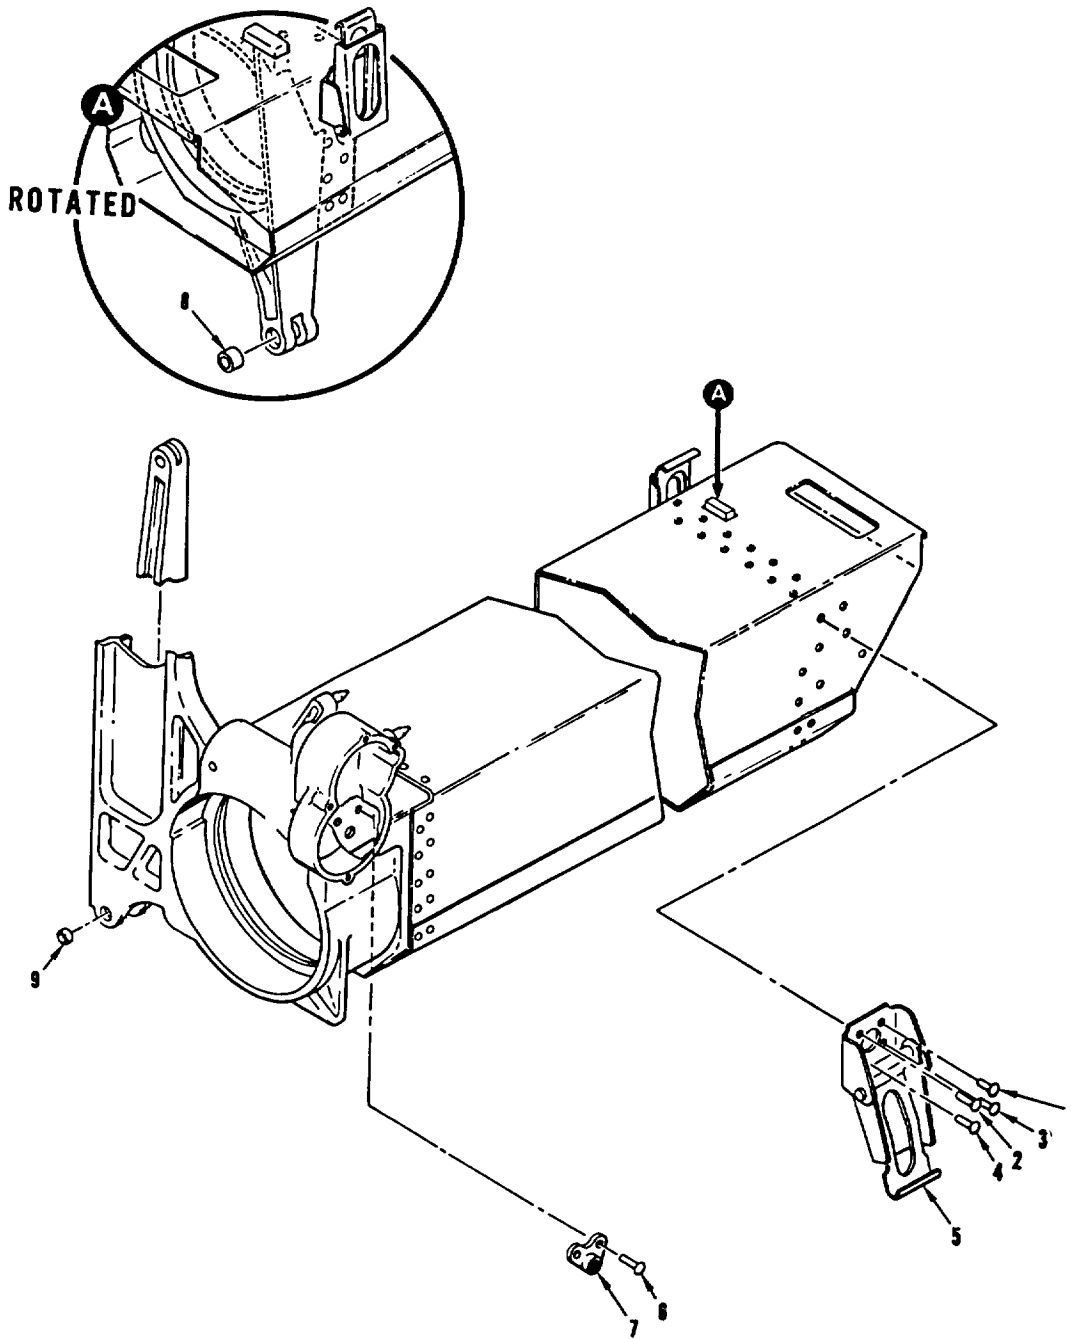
Housing and tube assembly-partially exploded view (sheet 2 of 2).
